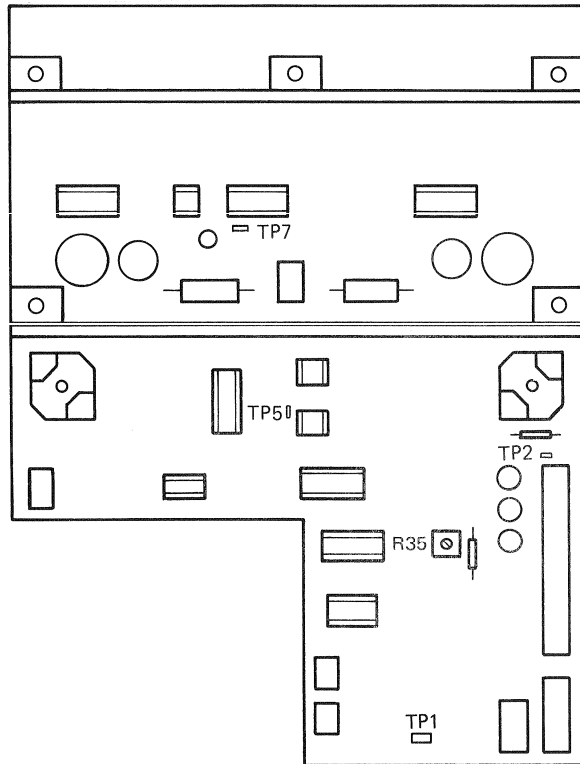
Spooling motor control PCB 1.727.340
